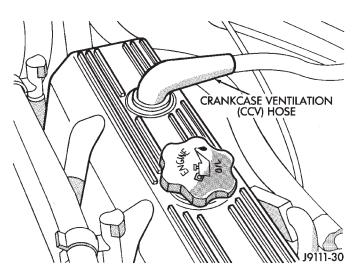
Crankcase Ventilation (CCV) Hose (2.5L Engine)
